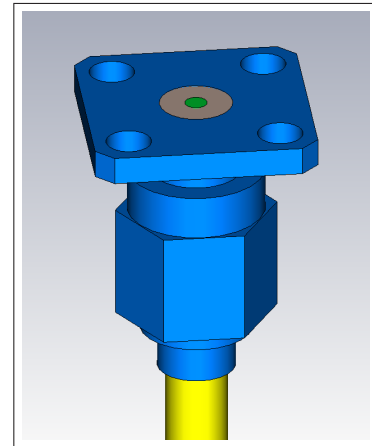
Open-ended SMA coaxial probe with panel-mount flange.
